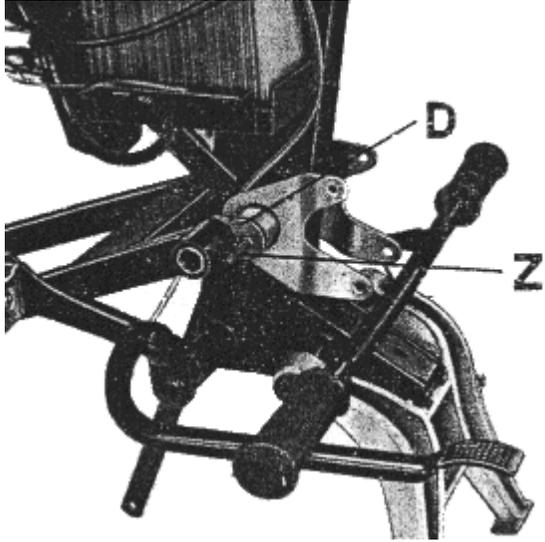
Engine shoes axially compressed by pressure ring (D) and draw spindle (Z) with M 6 thread. Rear wheel swing arm fitted
